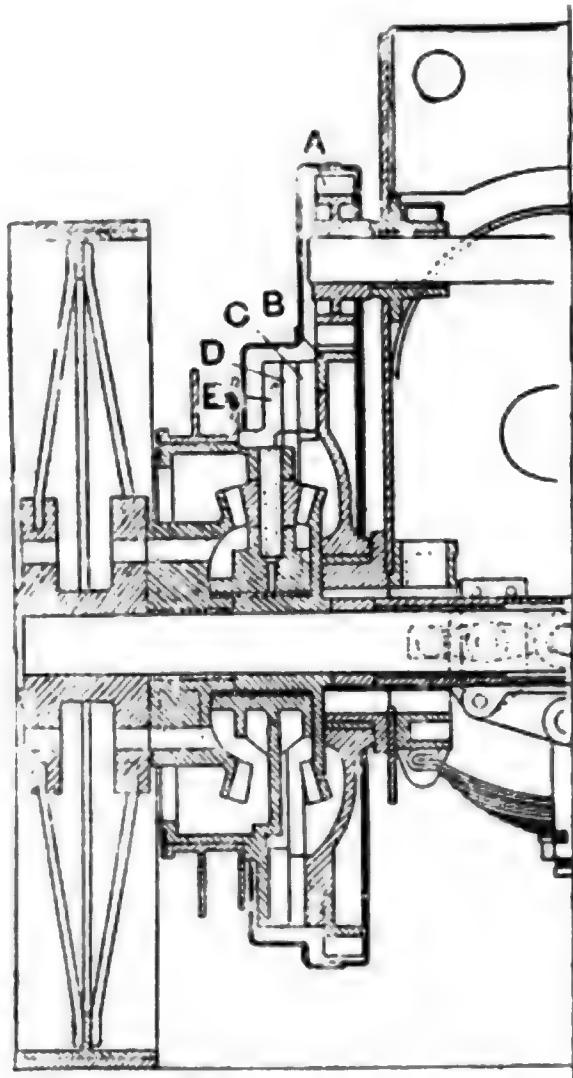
DIFFERENTIAL GEAR AND SLIP DRUM.
